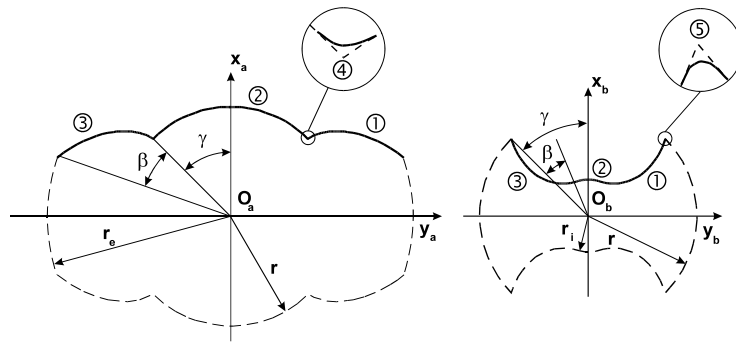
Cross section of the rotors: central rotor (left), idler rotor (right).
